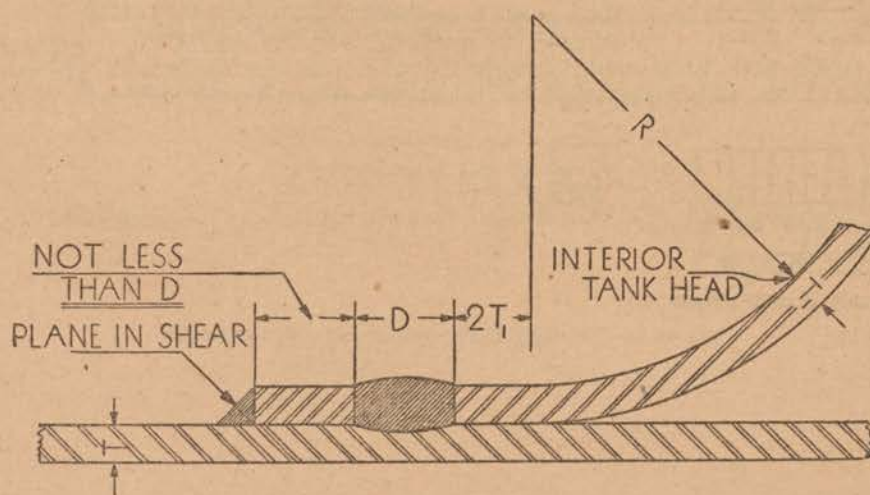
Single full fillet lap joint with plug welds interior heads of compartment tank cars.
